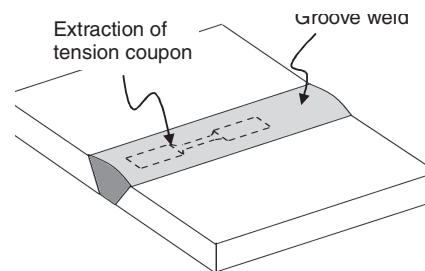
Plate assembly (per AWS A5.20) indicating extraction of all-weld metal tension specimens.
